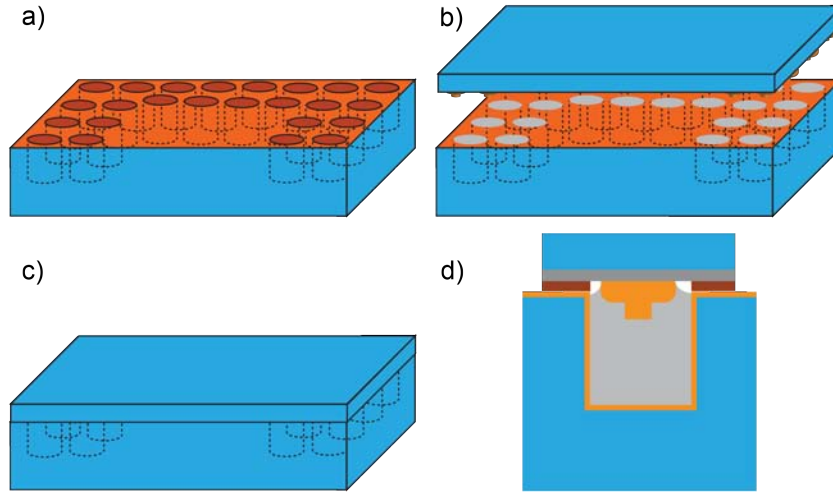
Usage of Template 1: (a) overview of bare template; (b) template filled with solder paste and chip facing setup upside down; (c) soldered template-chip-sandwich; (d) cross section of soldered ball bond.
